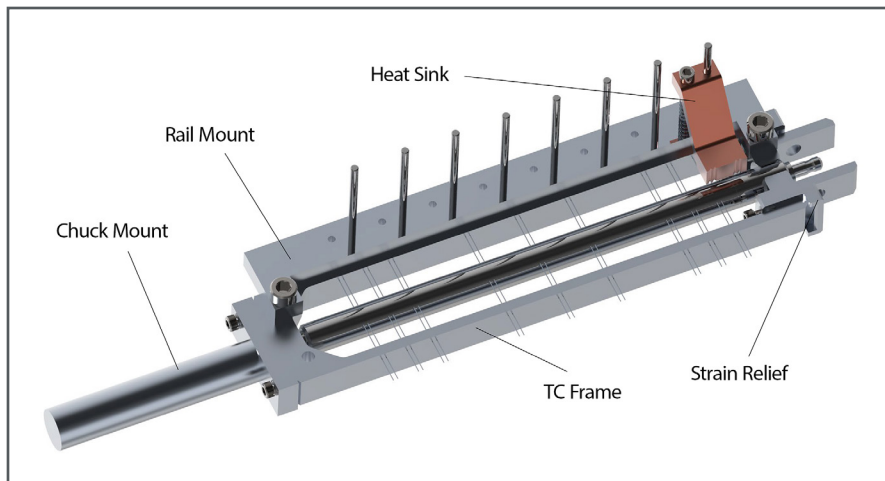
Rendering of the prototype fixture concept to weld thermocouples to the surface of rodlet cladding
